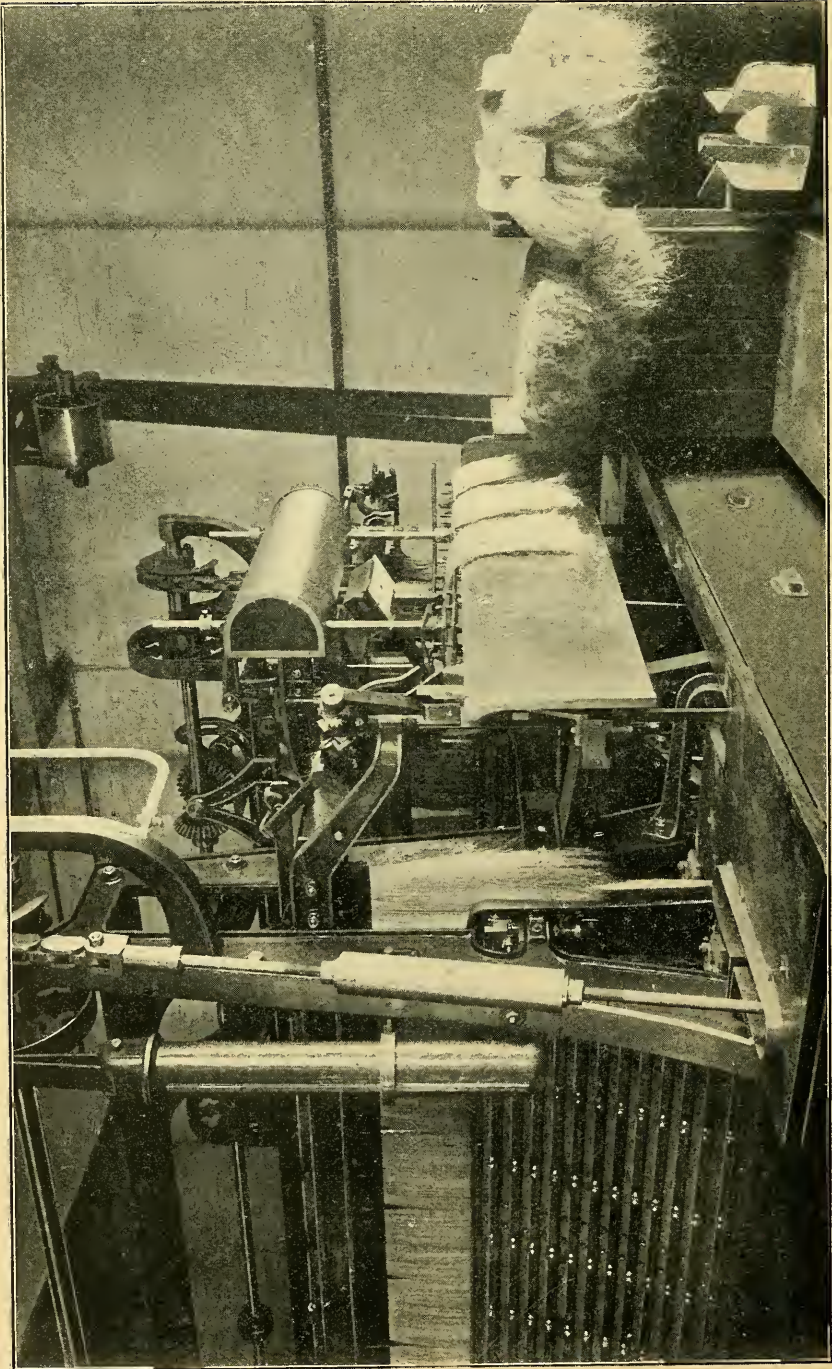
Reade, Crawford, & M'Kibbin's patent automatic screwing for hackling machines. (Filling end.)
